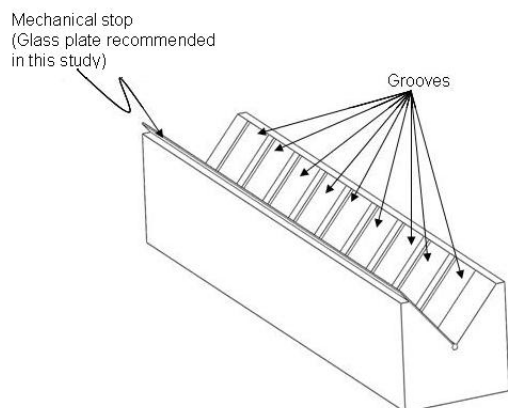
Fixture used in the P-GAP process in Figure 4 is an example. Several design mod-
